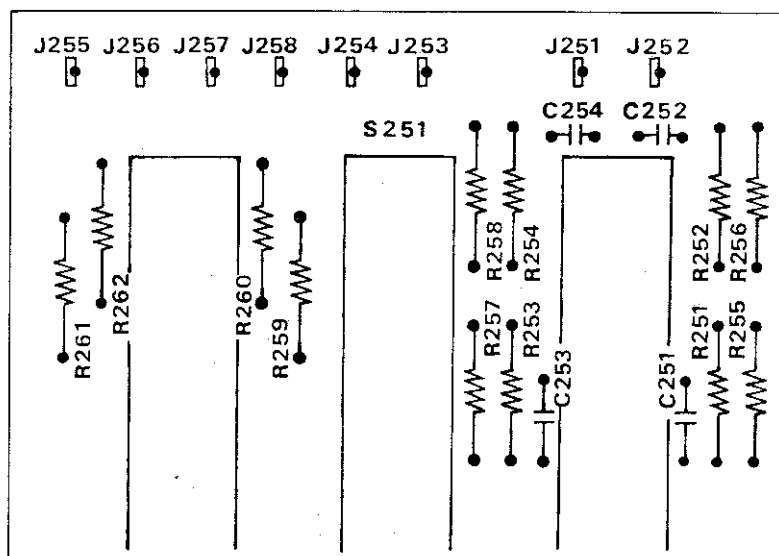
Tape Moni., Hi Filter Unit Assembly P250 Component Locations
